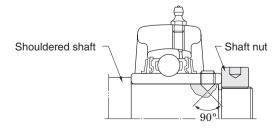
Example of installation with a shouldered shaft and shaft nut
